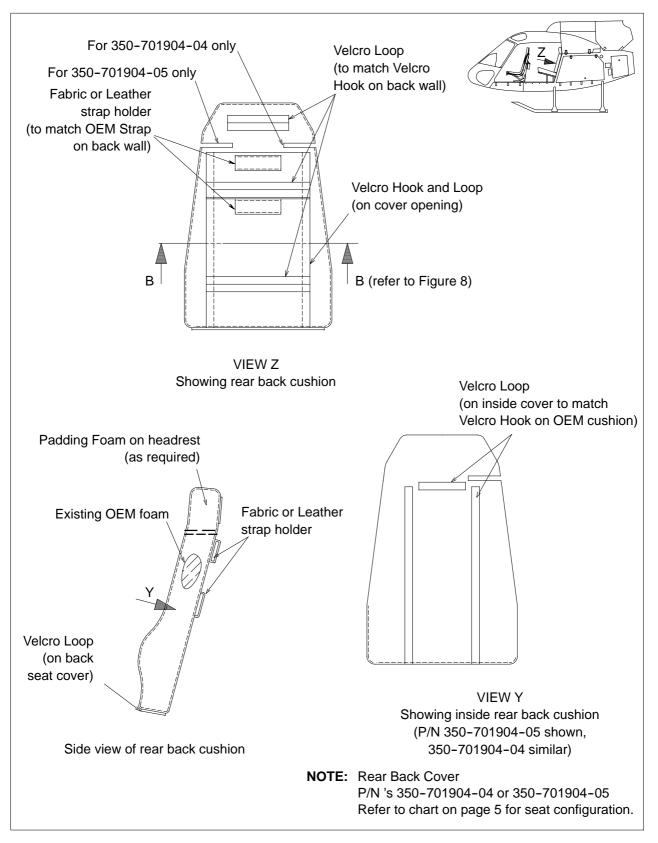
Rear Seat Cover Details (Sheet 1 of 2)
